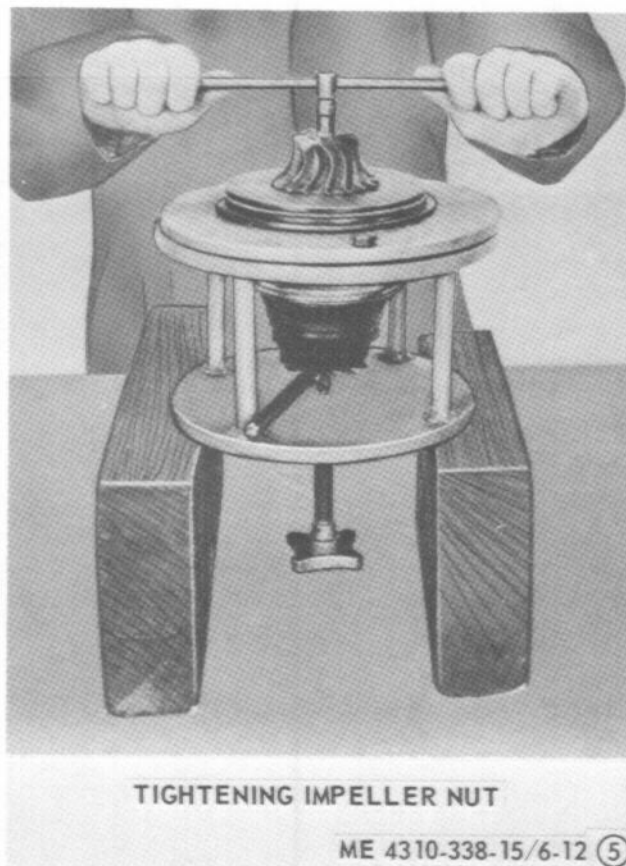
Turbocharger assembly, disassembly and reassembly (sheet 5 of 5).
